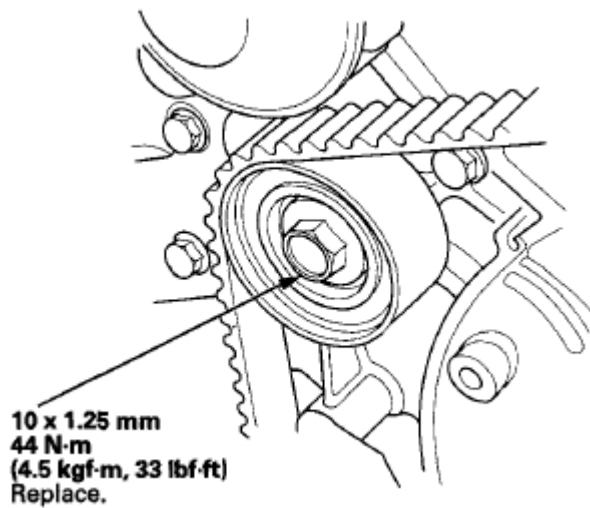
Tightening Idler Pulley Bolt With Torque Specifications
